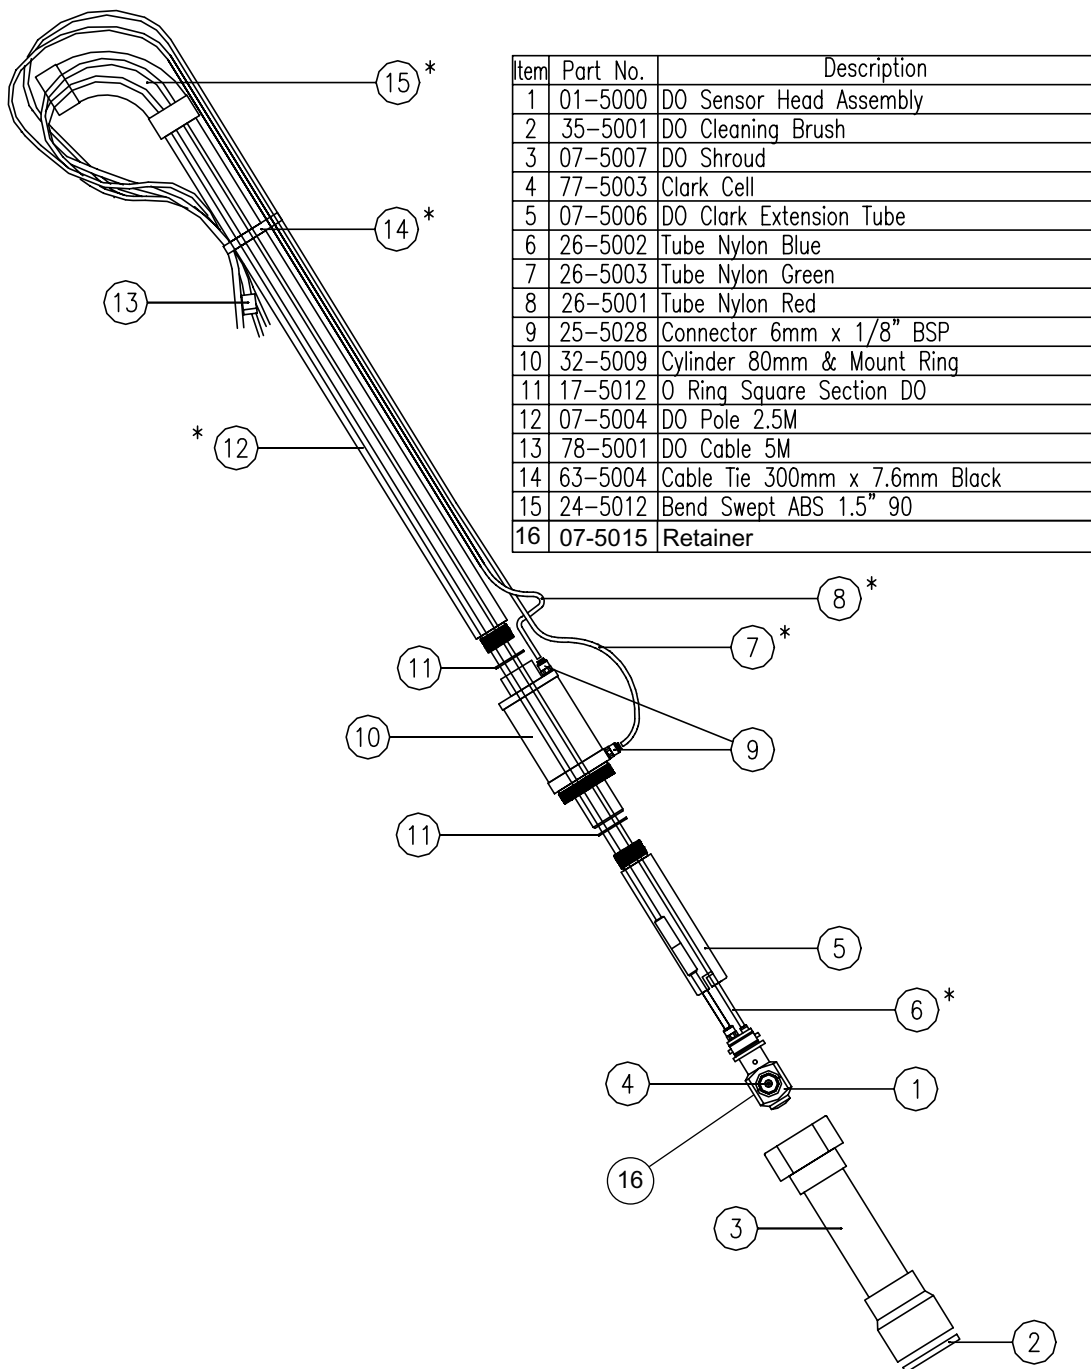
Diagram of Clark cell DO Wet End Assembly
